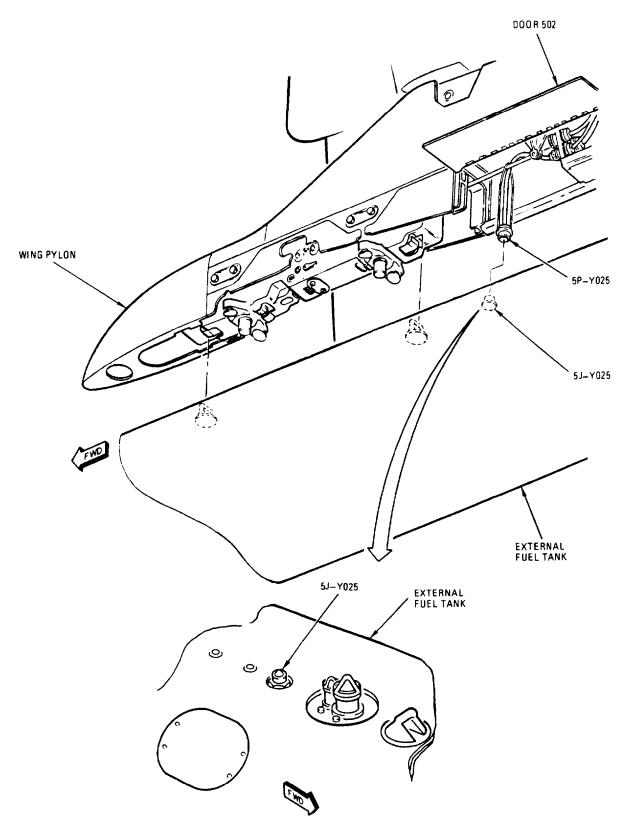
Refuel/Defuel System Component Locator (Sheet 12)
